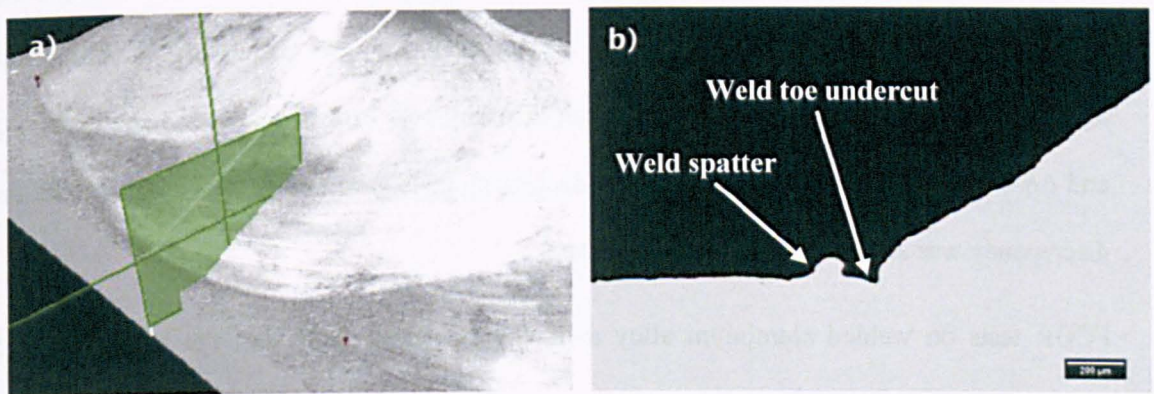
Location of small notch-like defect (undercut) located adjacent to weld spatter at the end of the weld return.
